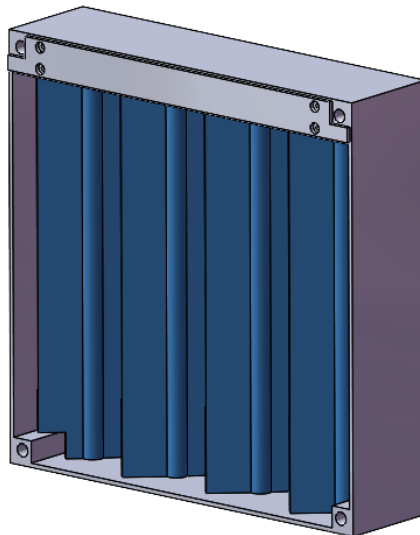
Damper blades are highlighted in blue. Shown is a four-blade configuration.
